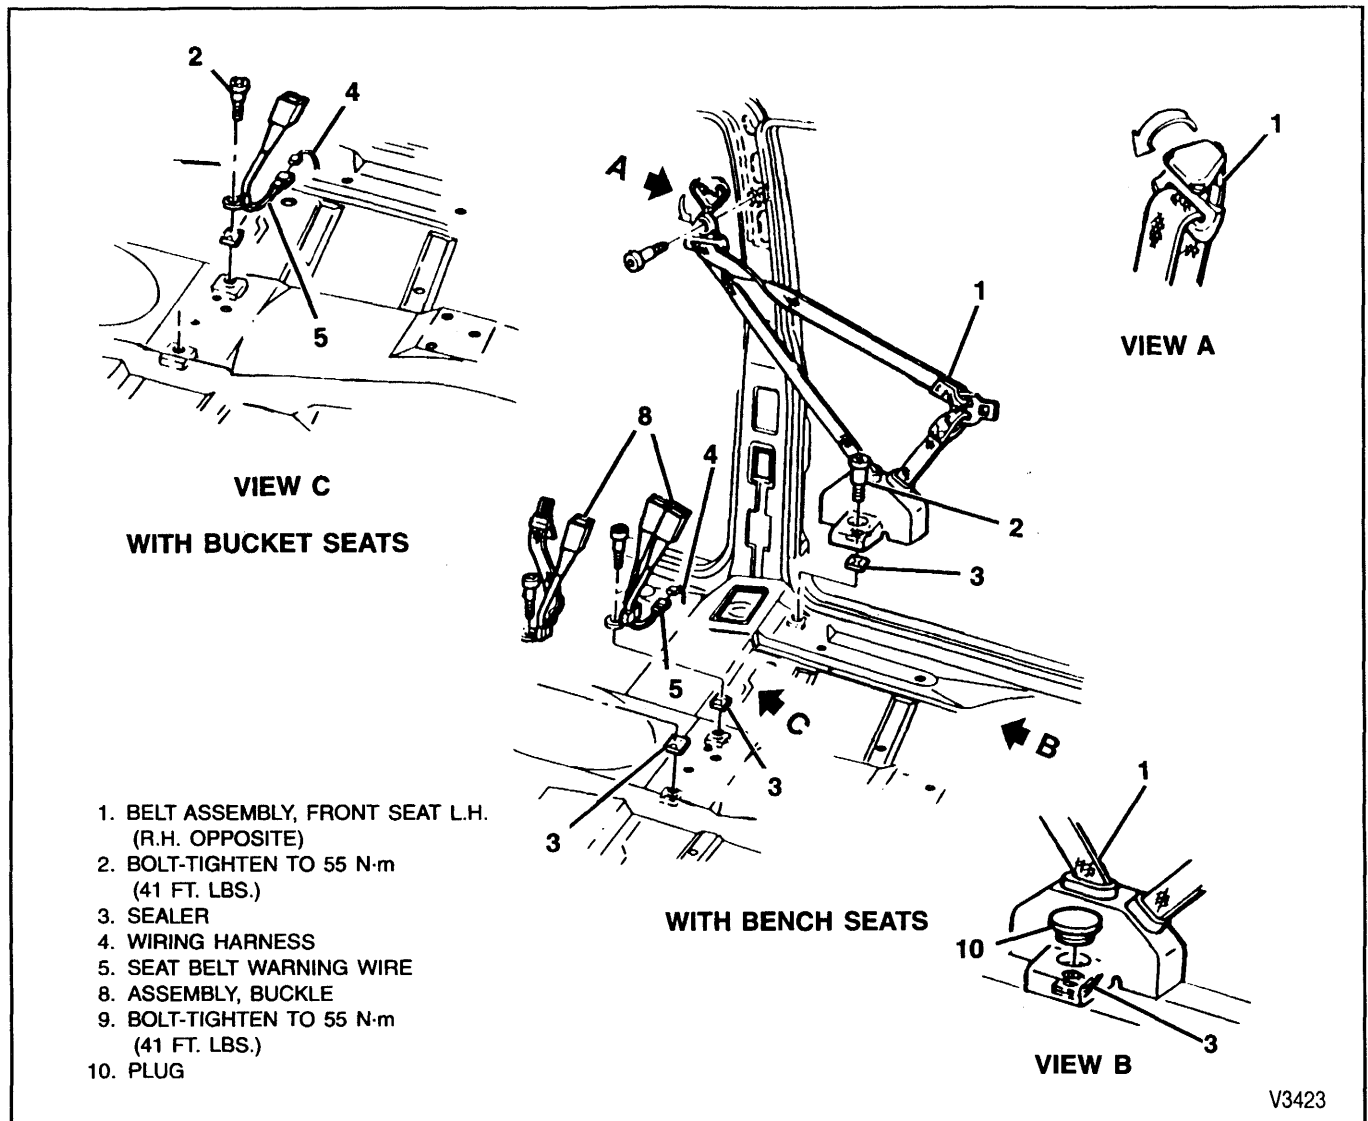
Front Seat Belts (Suburban and Crew Cab)
